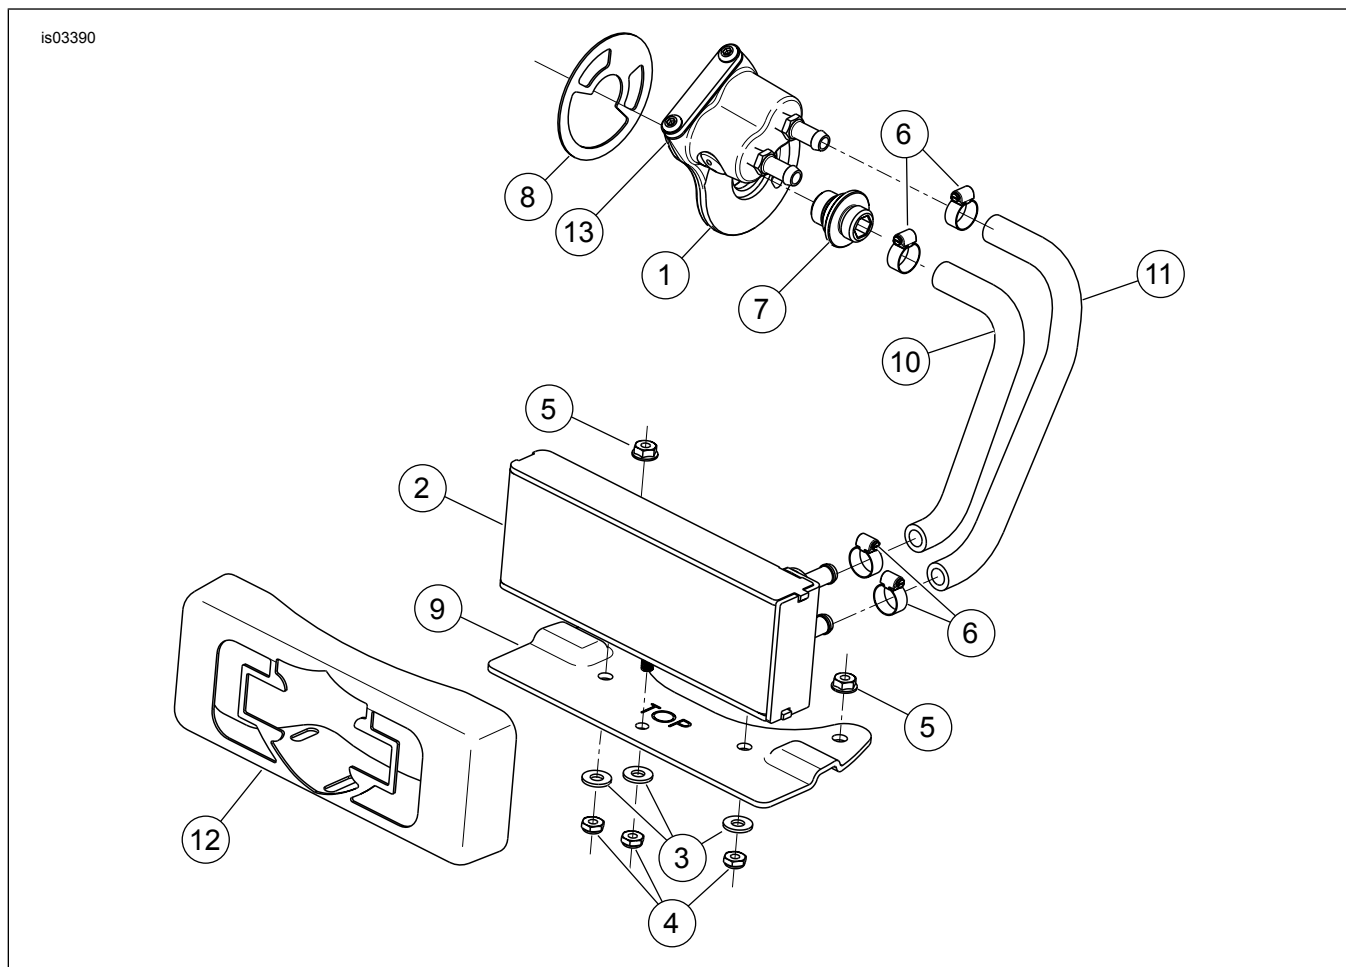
Service Parts for Touring Oil Cooler Kit with Chrome Oil Cooler Cover
